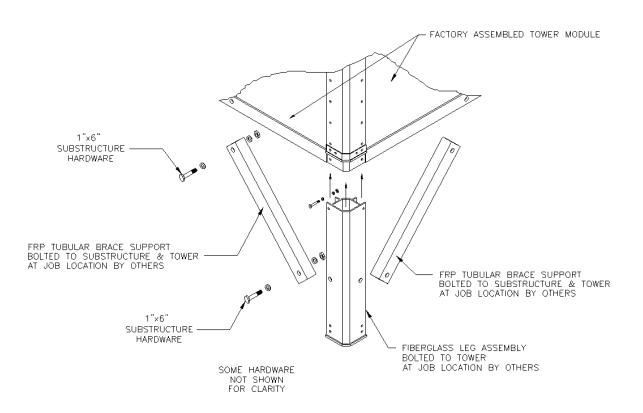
Installation Detail for Sub-Structures Taller Than One Foot (30.5 cm)
